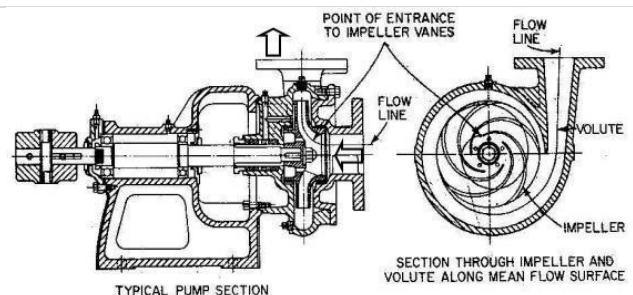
Cross-sectional view of a horizontal-shaft centrifugal pump.
